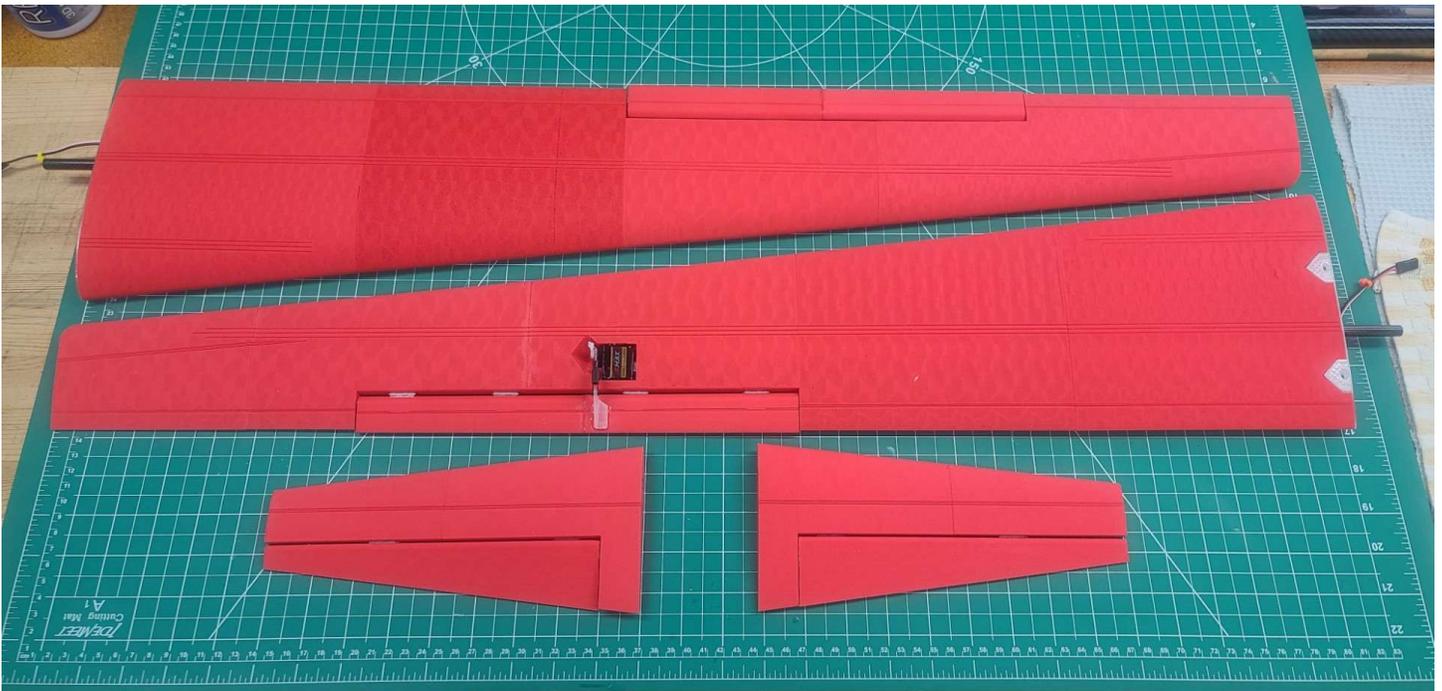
RQ-4 Assembled Wings & V-Tail Surfaces
